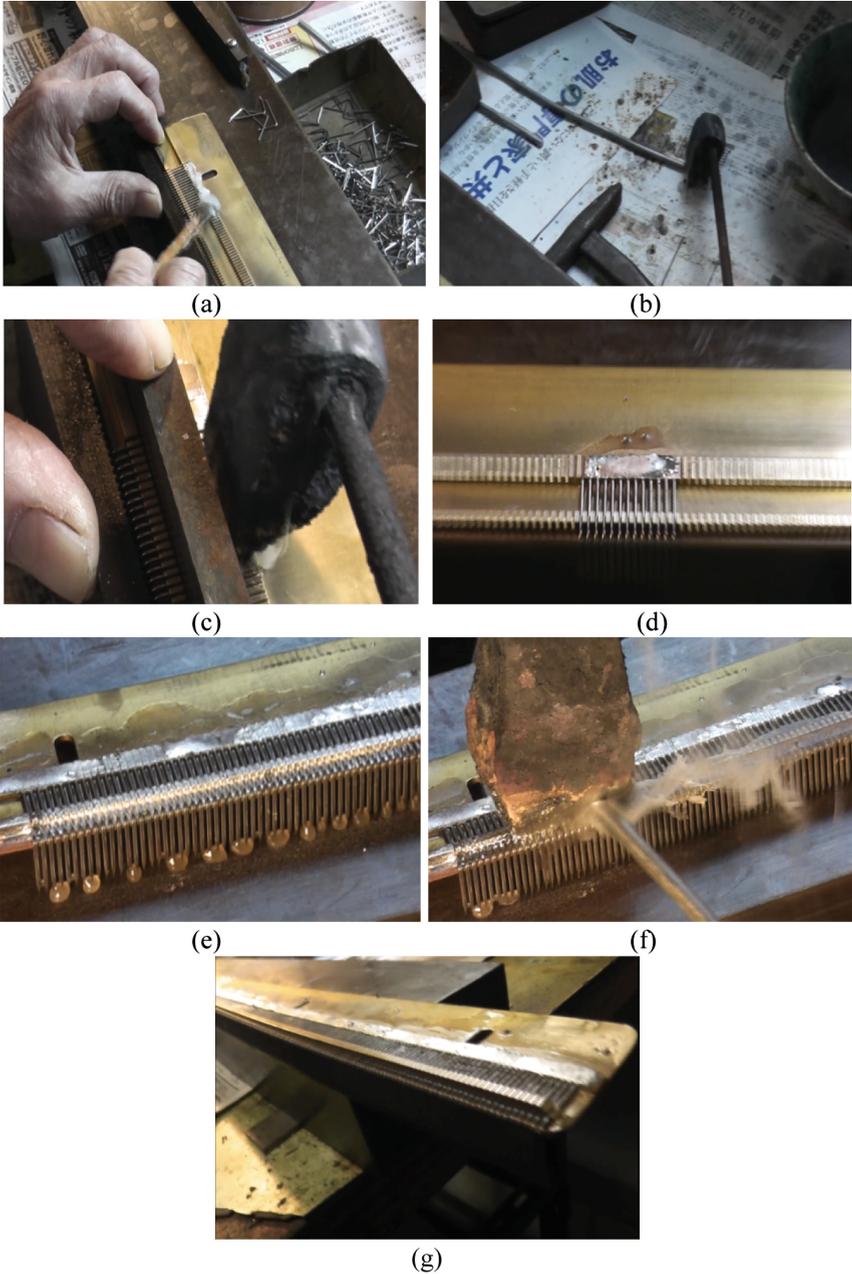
Soldering process of the brass bar: (a) Apply flux, (b) Preparation of the solder and the heated soldering head, (c) Tap the soldering head on the soldering area, (d) Complete soldered area, (e) Extended soldering area, (f) Continue to solder on other area of brass bar and (g) The finished soldered brass bar.
